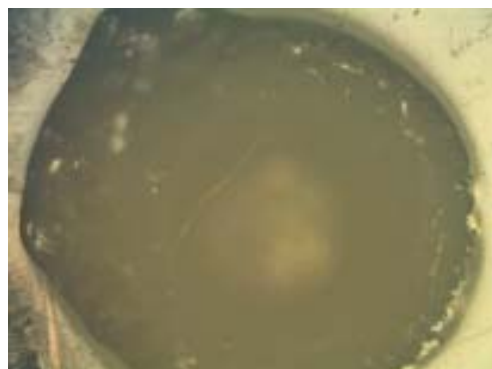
Perspex and Tool Burning by Type-I Drill Bit
